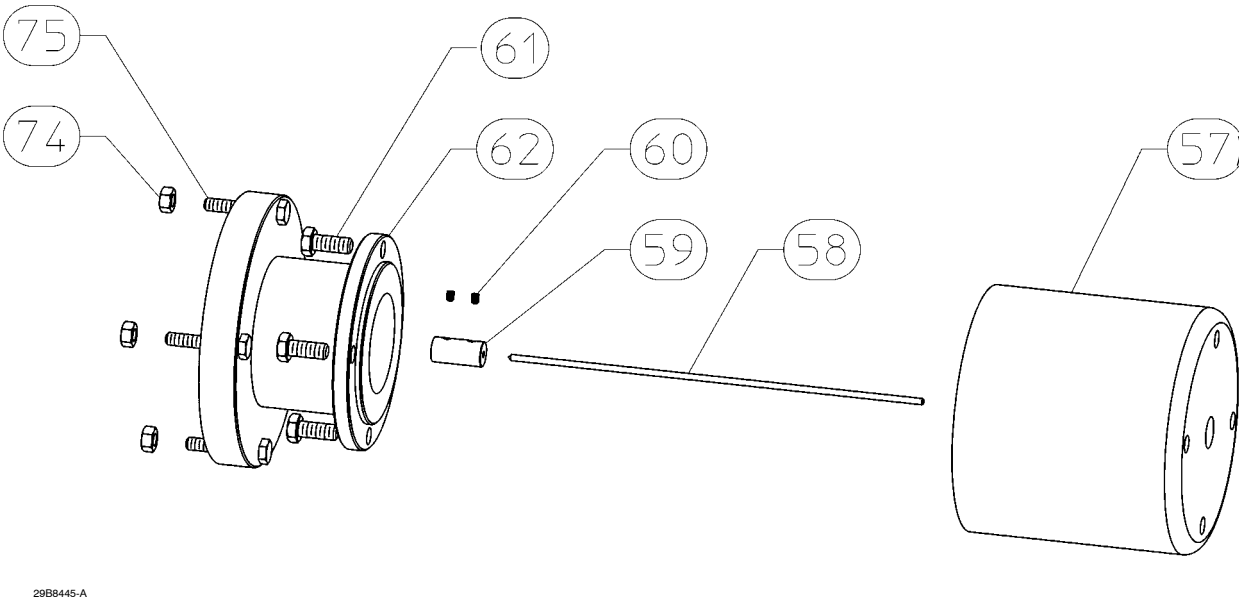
Mounting Kit for Masoneilan® 12200 and 12300 Sensor with Heat Insulator
